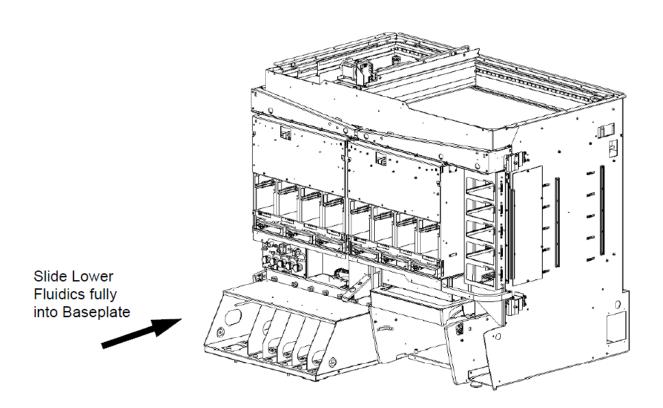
Sliding the Assembly from the System When replacing the assembly, apply Loctite 222 to all screws.
